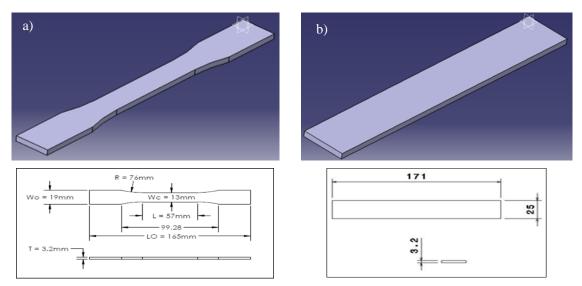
(a) Part A (above: geometry, below: dimension) and (b) Part B (above: geometry, below: dimension).
